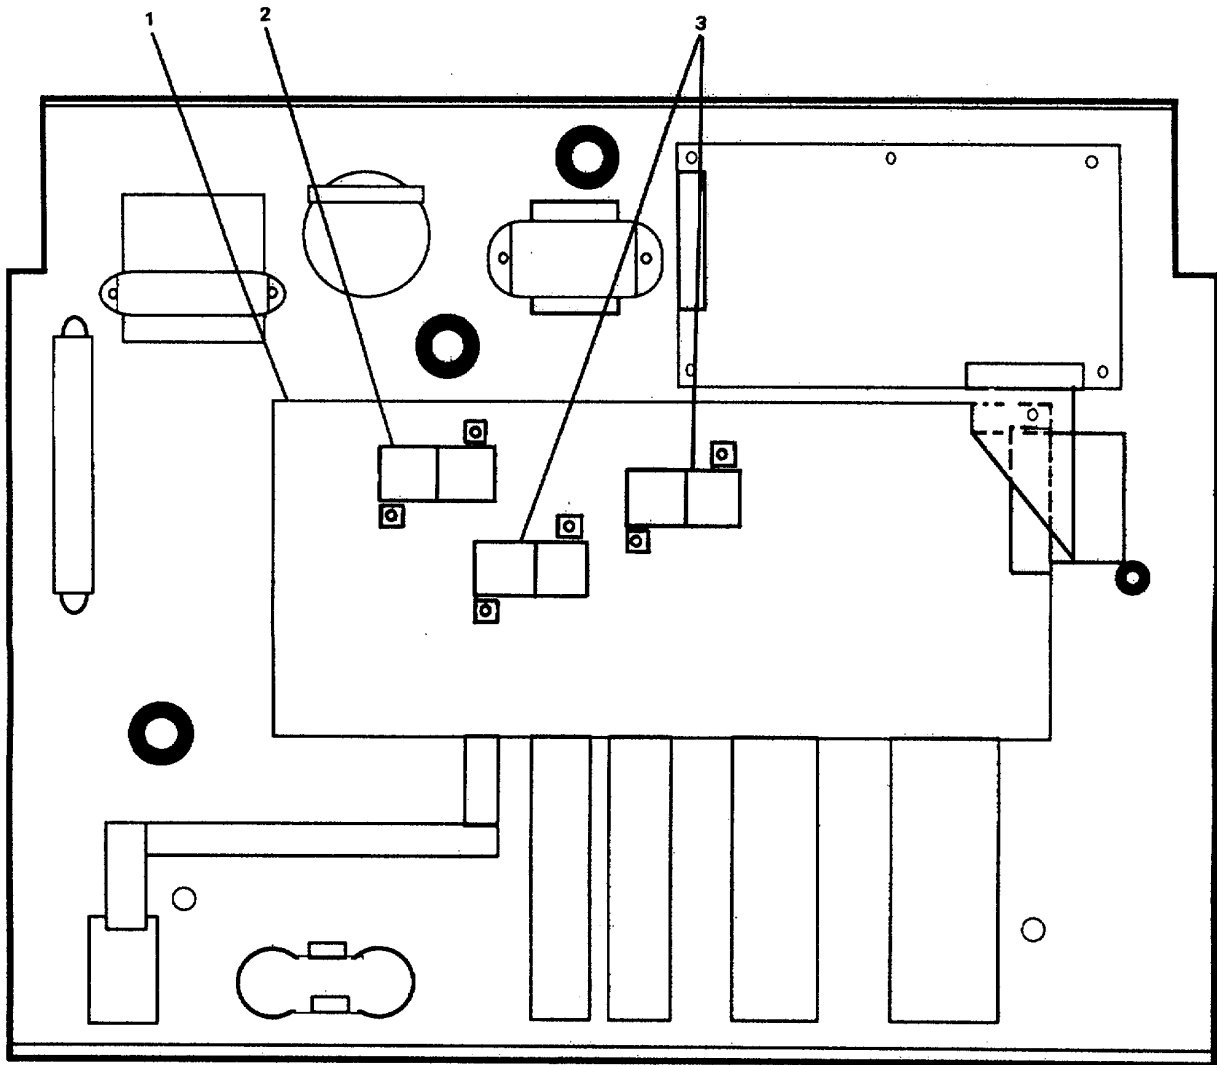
Replace/Repair Electronic Assembly (Sheet 2 of 2).
